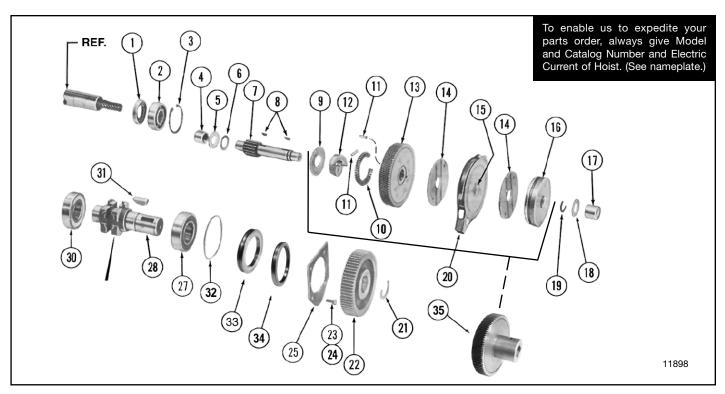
GEARING AND LOAD BRAKE PARTS (1/4 and 1/2 Ton Hoists)
